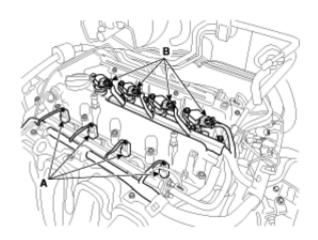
Identifying Injector Connectors And Ignition Coil Connectors Courtesy of HYUNDAI MOTOR CO.
